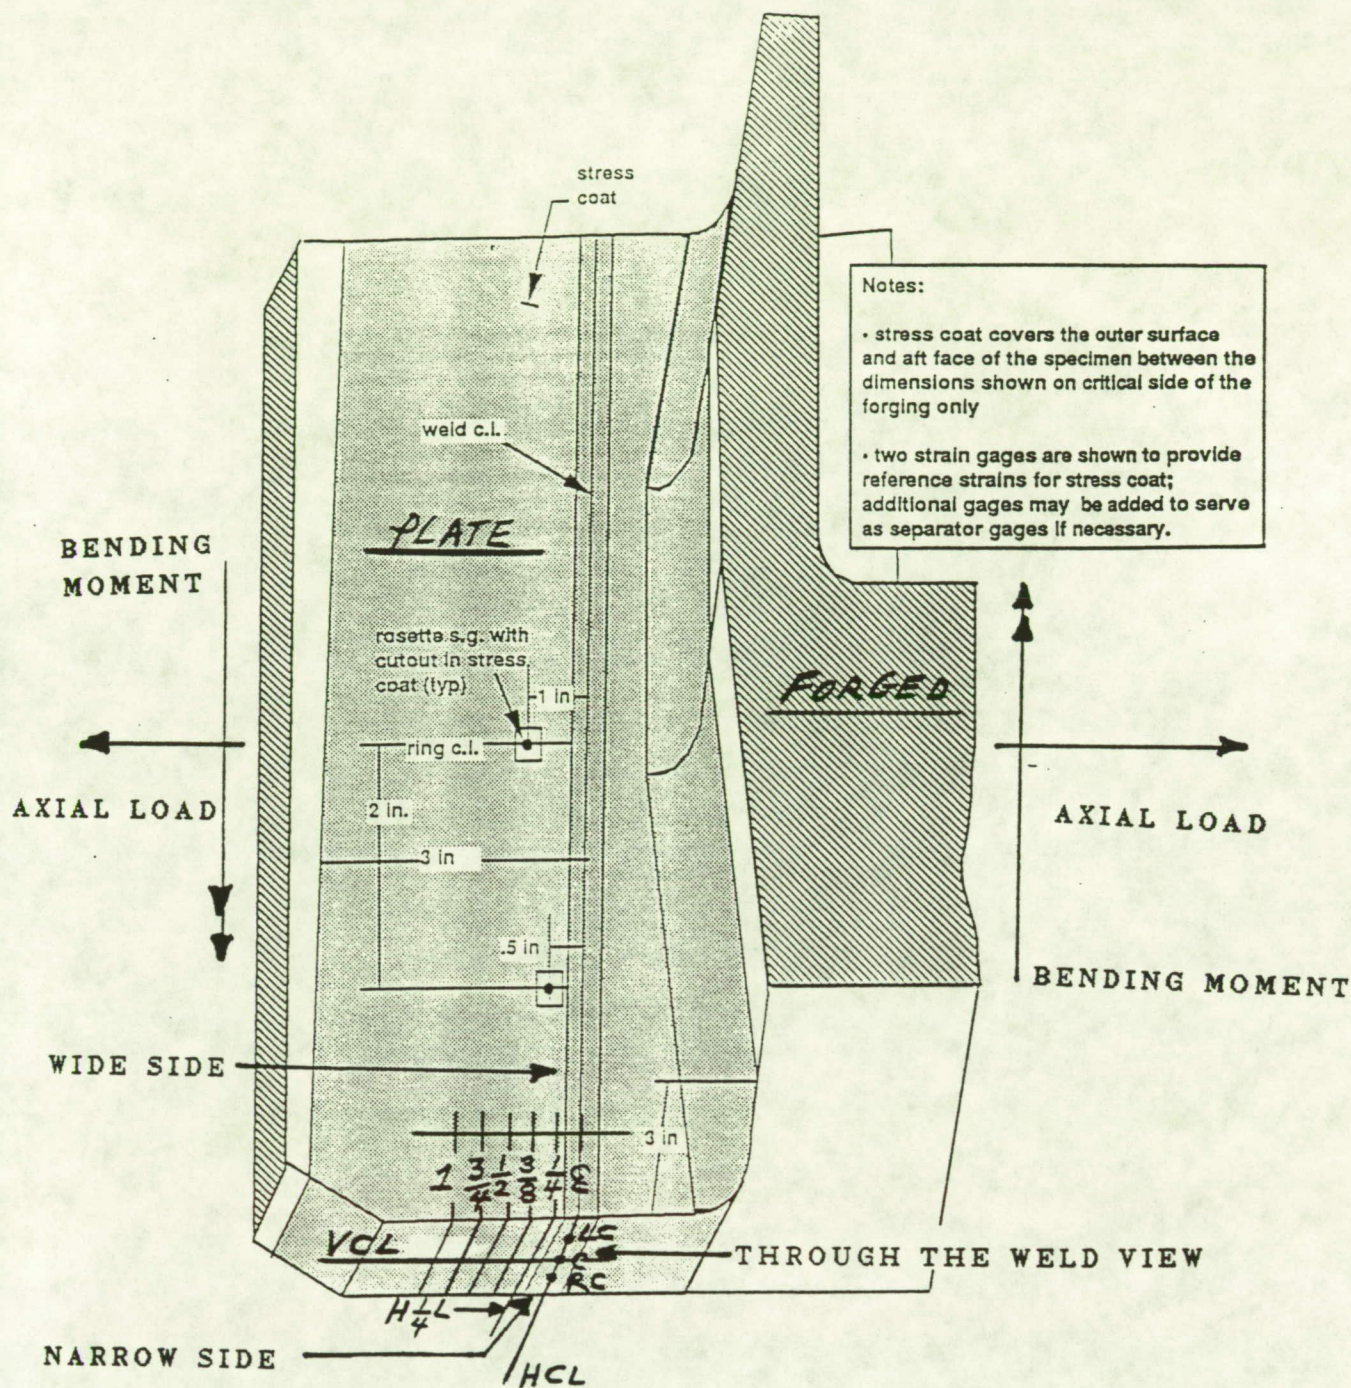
PHOTOELASTIC COATING IN TEST SPECIMEN NO. 4
